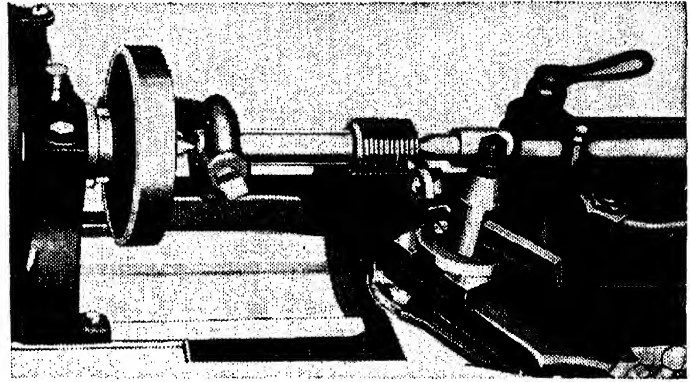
Cutting a screw thread with the compound rest set at 29° . (Courtesy South Bend Lathe Works.)
